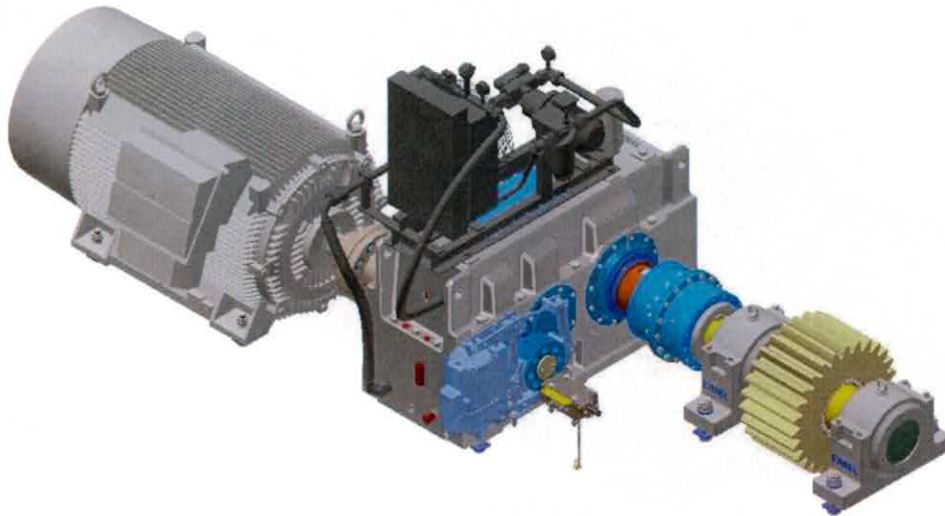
Drive unit (gearbox, motor, couplings and pinion gear group)
